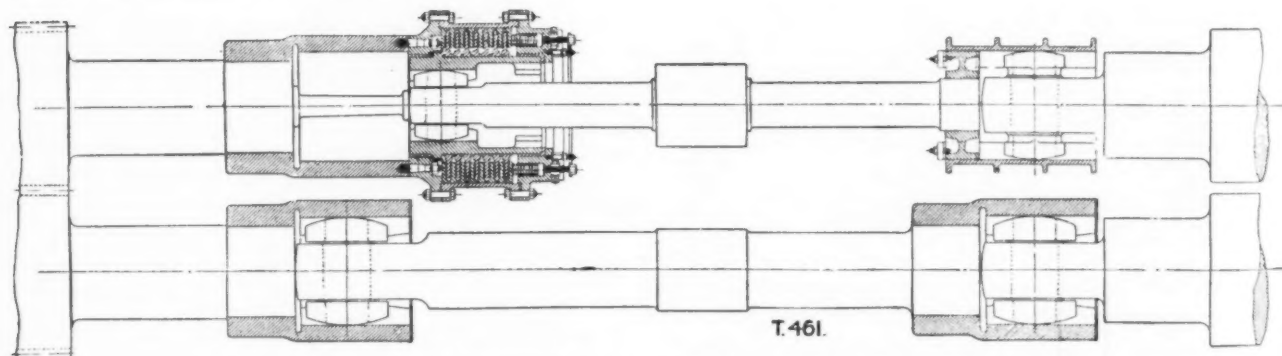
SLIP DRIVE ON THE TOP ROLL OF ROUGHING STAND, 42-IN. BRITISH PLATE MILL
